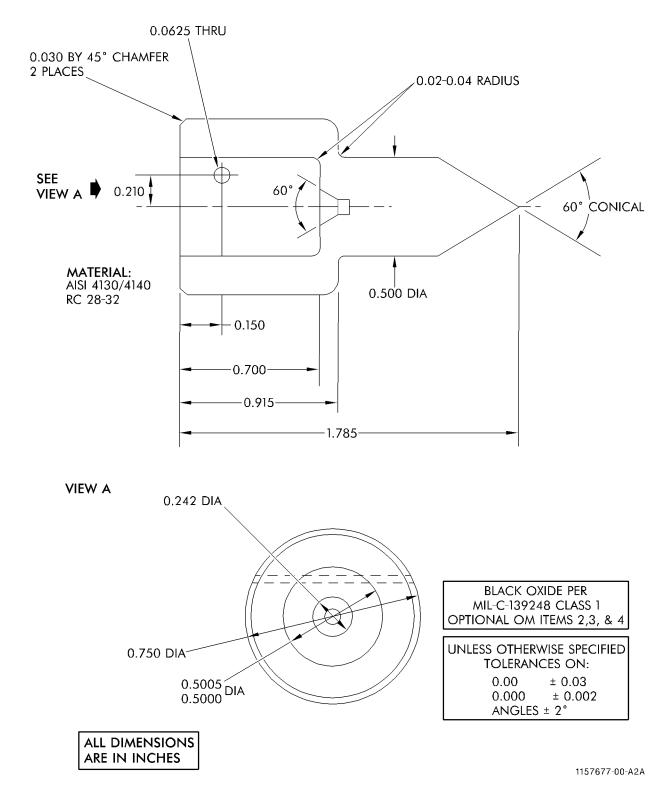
Clinch Nut Flaring Set LMT 962 (Sheet 2 of 3)
